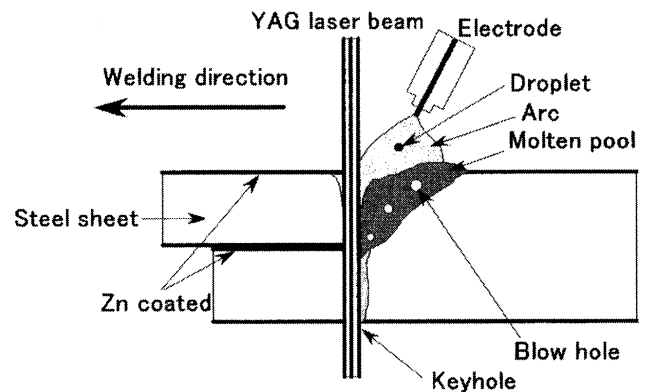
Schematic illustration of the weld zone of a longitudinal cross section showing the principle of laser/arc hybrid welding process of Zn-coated steel in a lap joint³⁾.
